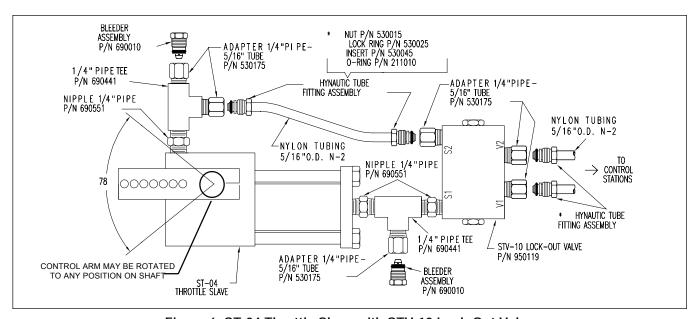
ST-04 Throttle Slave with STV-10 Lock-Out Valve
